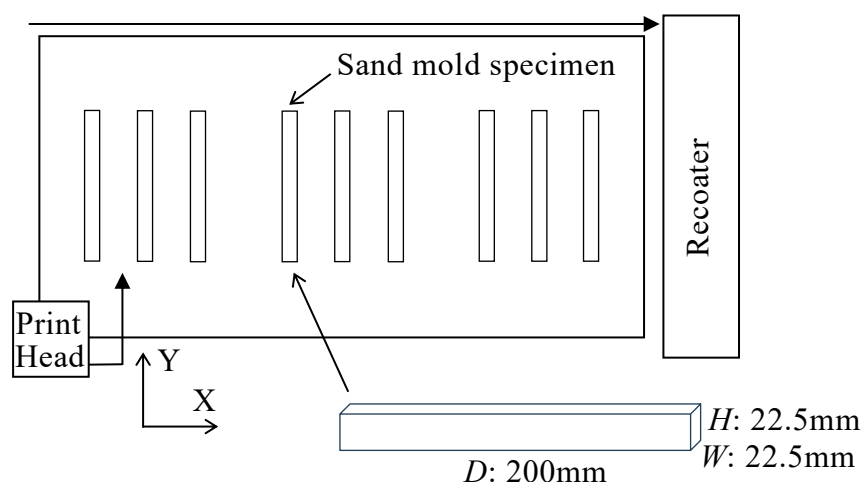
Schematic diagram of sand mold specimen layout.
